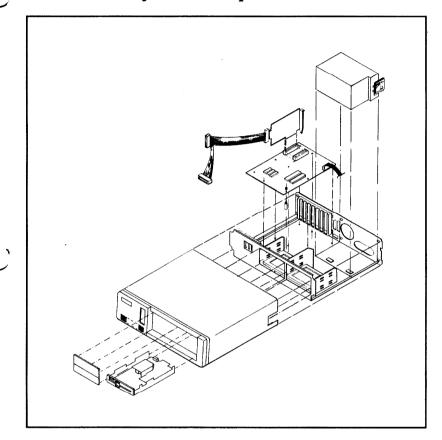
Exploded view of the Turbo XT and Turbo XT/2
